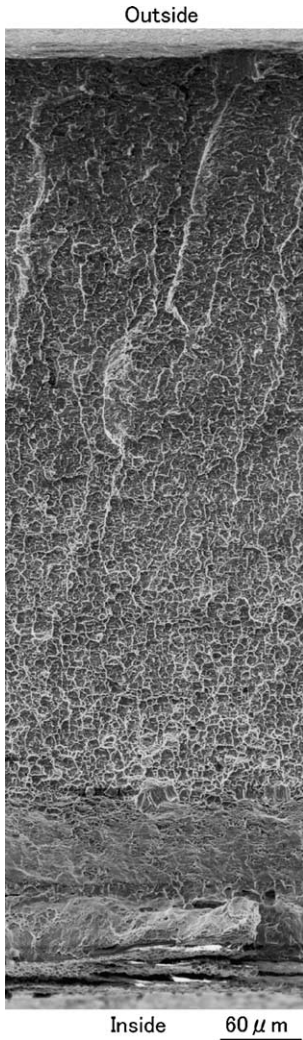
Morphology of fracture surface on P5(D8/C6-6) specimen.
